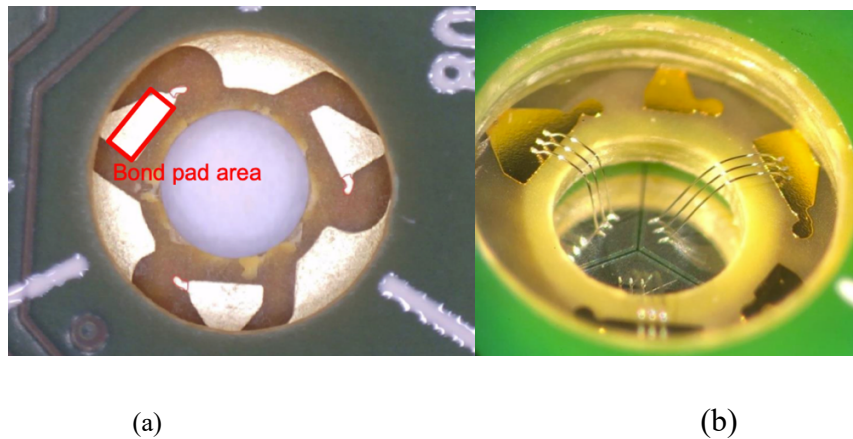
(a) Stepped hole showing the wire bonding pads. The bonding pads in the stepped holes are expected to be free of glue. (b) Image showing aluminum wire connections from PCB to silicon.
